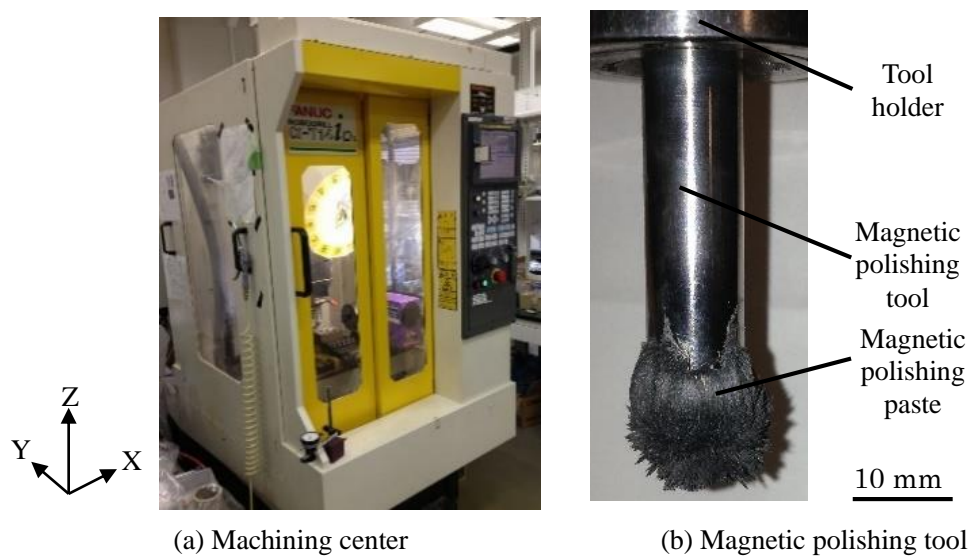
Overview of machining center and magnetic polishing tool.
